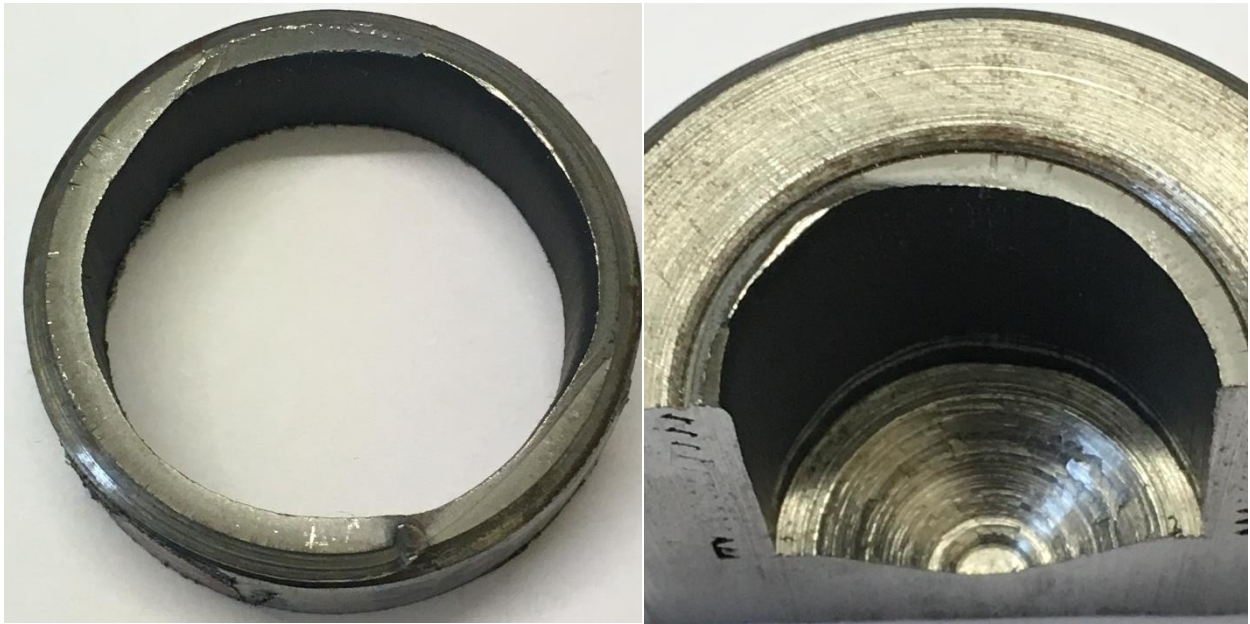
a) Fracture surface test low to high; b) Zone divided by the each marks.
